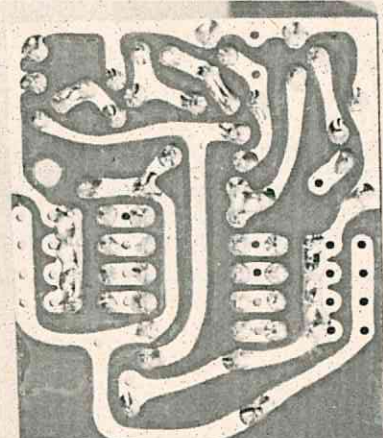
Decoder Board. Completed. Foil side showing soldered connections.
